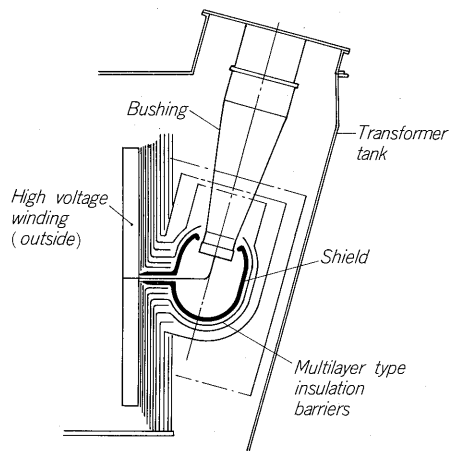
Insulating construction for bottom part of 900 kV bushing
